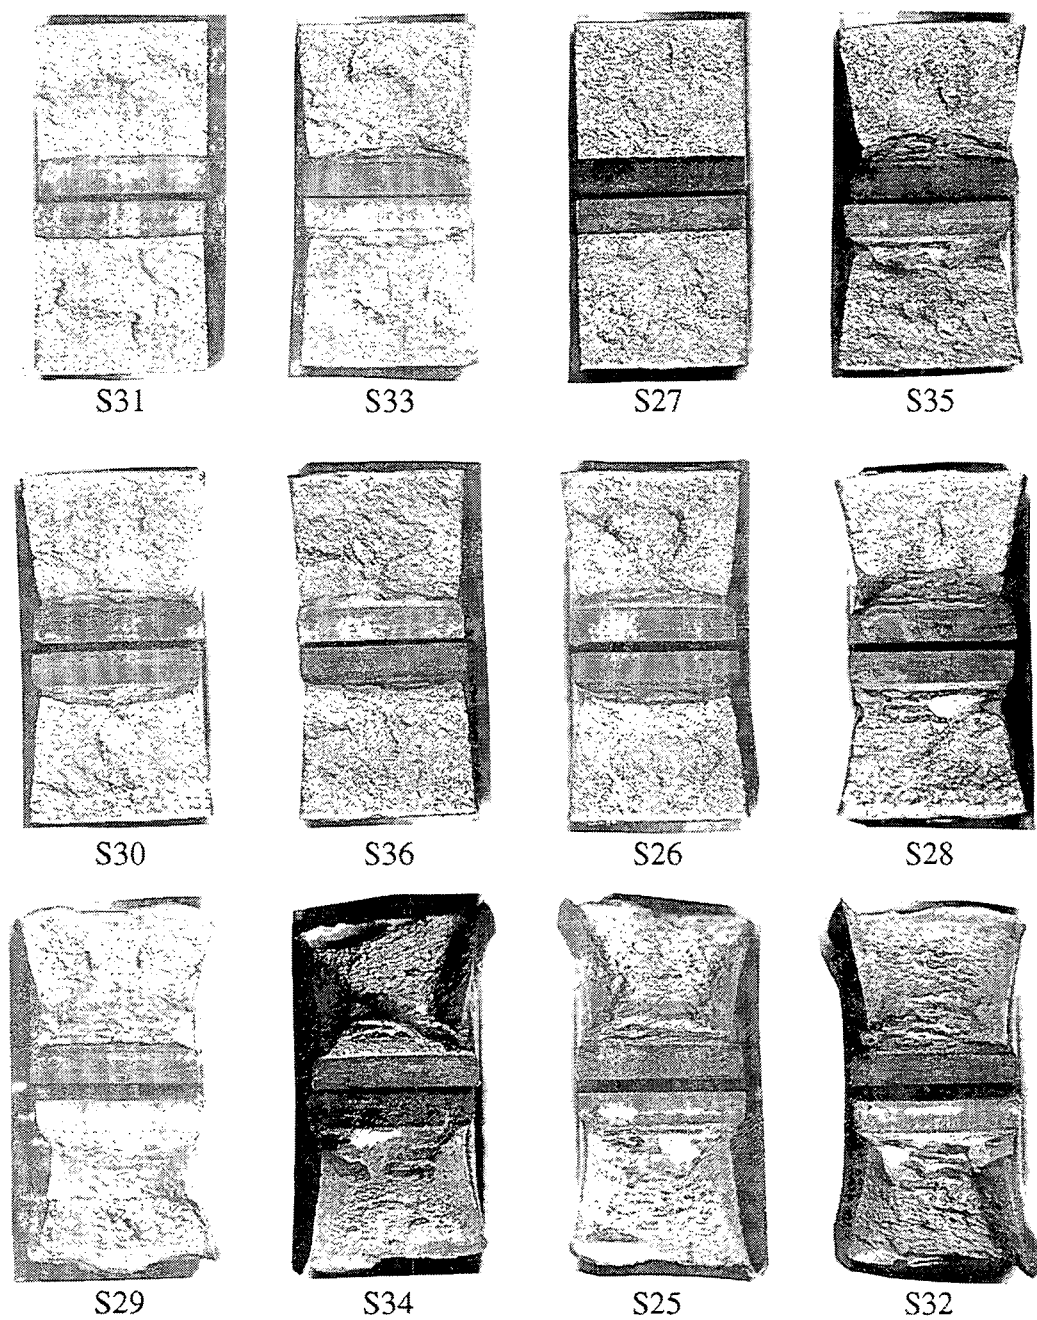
Charpy Impact Specimen Fracture Surfaces for Kewaunee Reactor Vessel Lower Shell Forging 123X167VA1 (Tangential Orientation)
